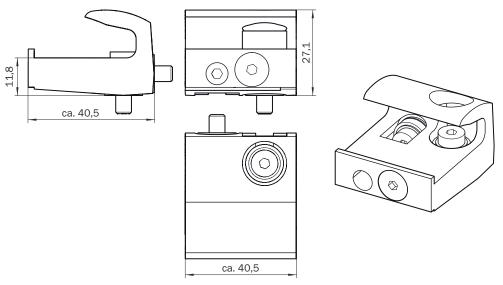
Dimensional drawing of C-Fix-Flex bracket, rotatable (mm), part number 2056598
